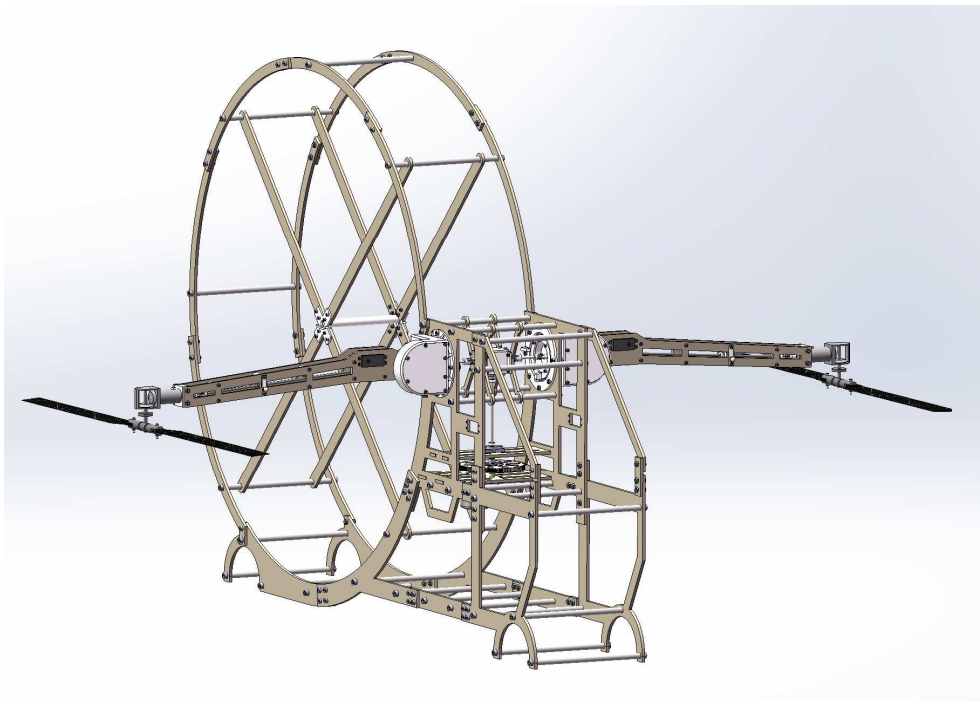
The complete assembly of the flight part with the fuselage part (Rotor arms open)
